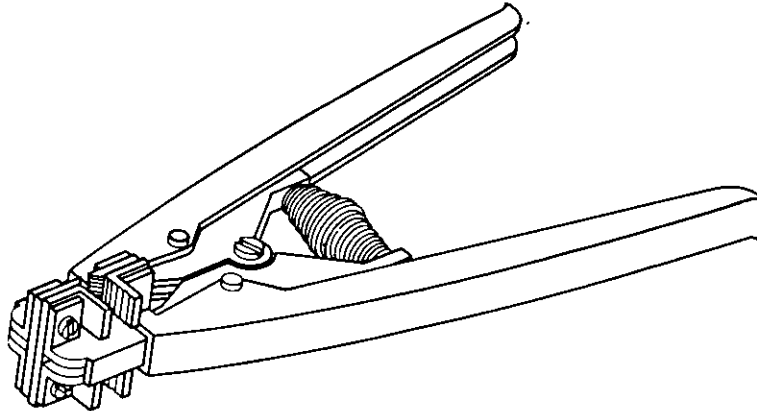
Mechanical hand wire stripper (see 4.11.2.2).
